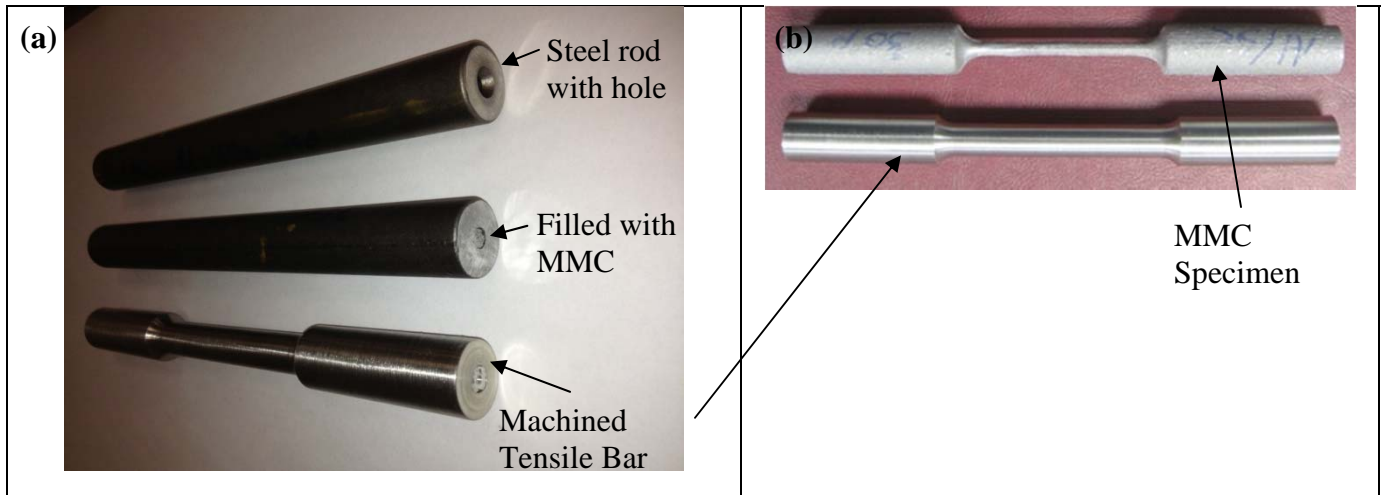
(a) Steel rod with hole for casting macro-composite tensile bars, (b) Steel rods with MMC cast in the center, (c) Macro-composite tensile specimen after machining (left) and as-cast MMC dog bone specimen (right).
